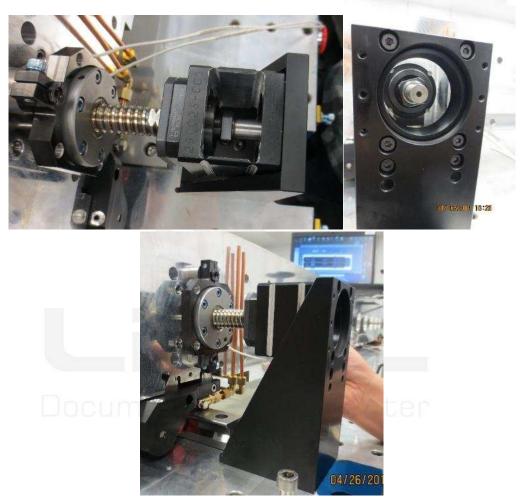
Ball Screw attached to the Ball Screw Support attached to the Coupling Housing, attached to the Mount Bracket. Bearing Housing Stop is installed, but only the bolts are visible.
